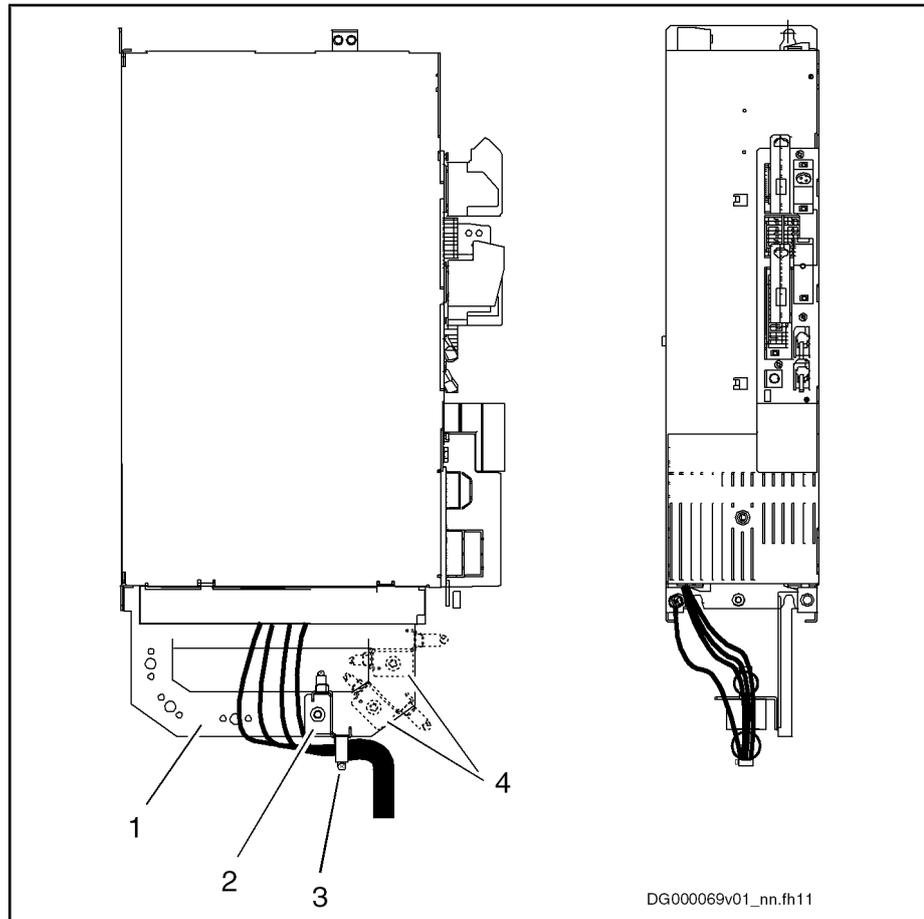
HAS02.1-003 at bottom of drive controller HMS01.1N-W0210
